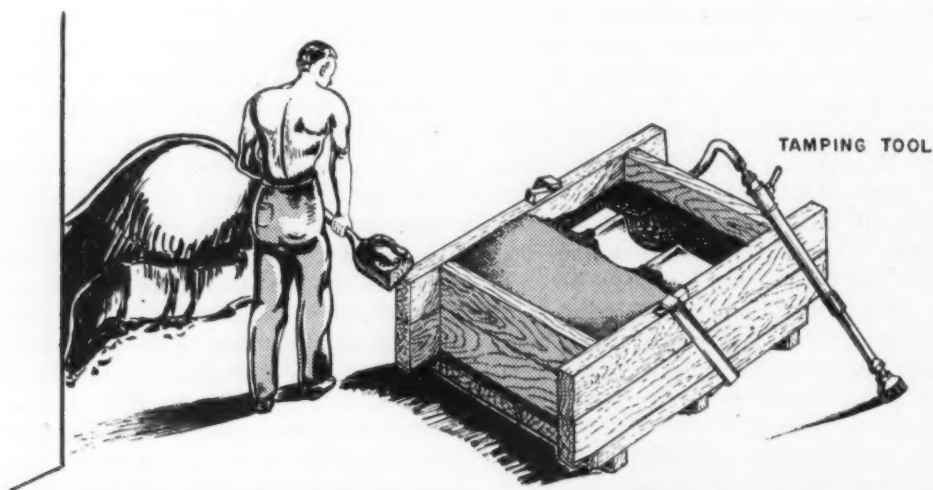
Tamping molding sand over the plaster pattern in making a mold for a zinc punch.
